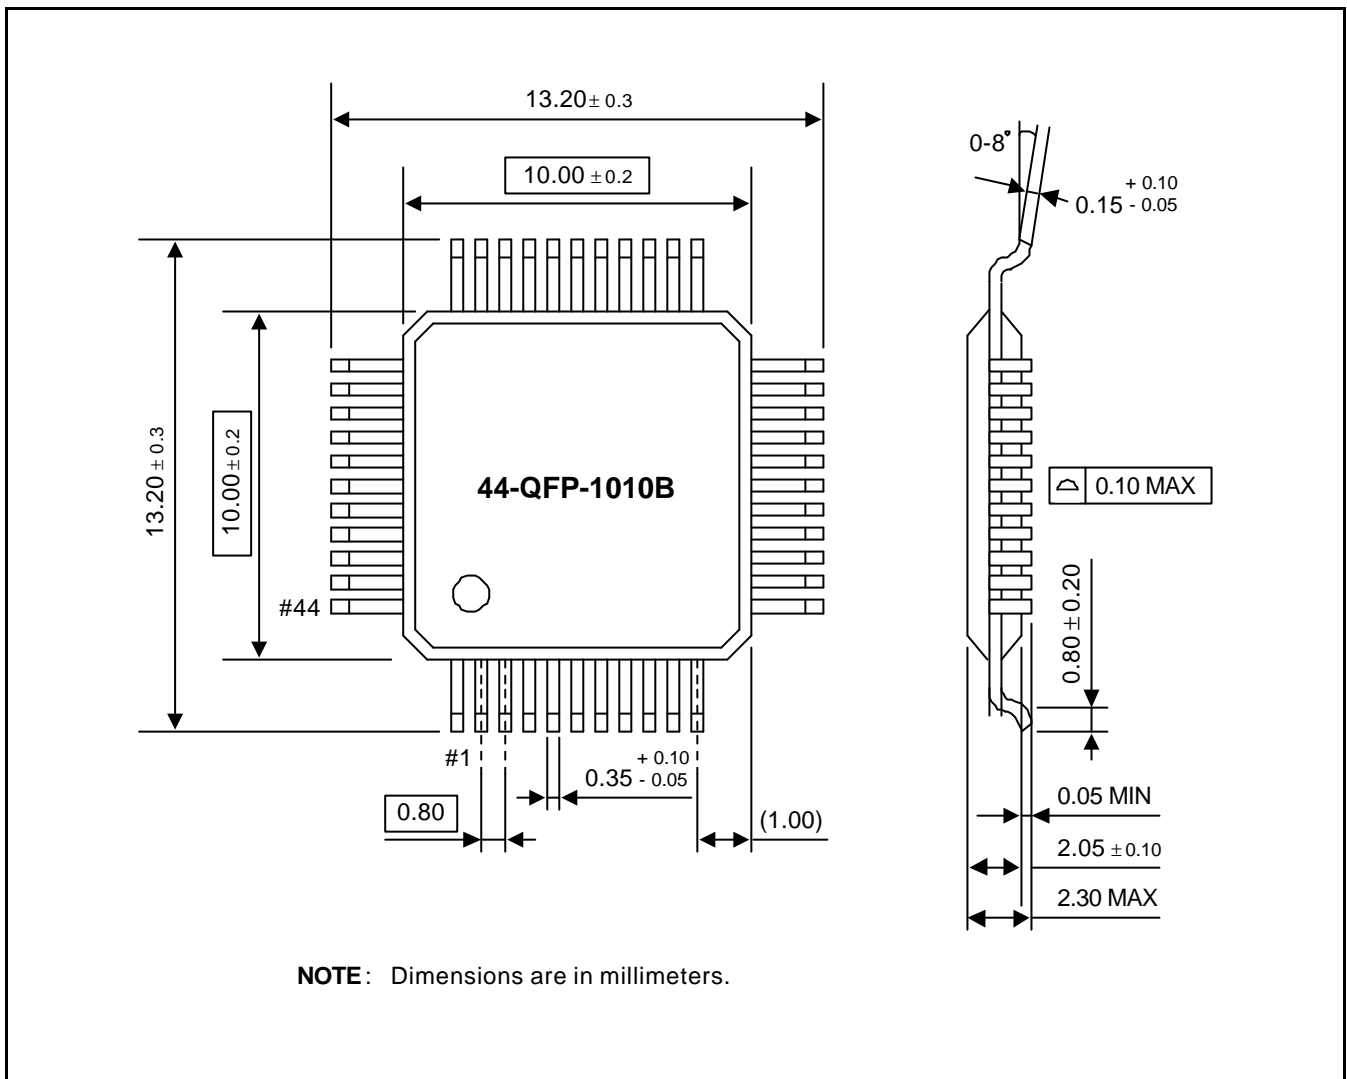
44-Pin QFP Package Dimensions (44-QFP-1010B)
